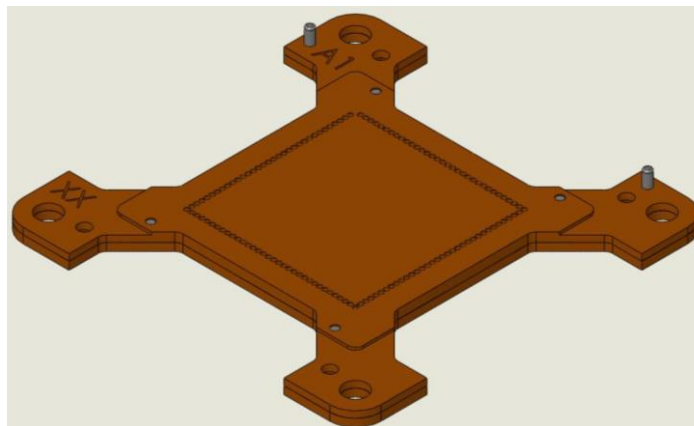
BGA or LGA Interposer Subassembly with press fit alignment dowels pins. This is the modular component of the Ardent socket system which can be easily cleaned, repaired and replaced.
